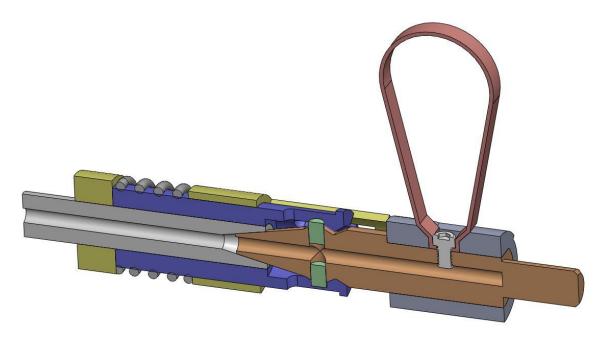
Electrode carrier allowed to be mounted into the driving shaft. Spring biased socket is in its back position.
